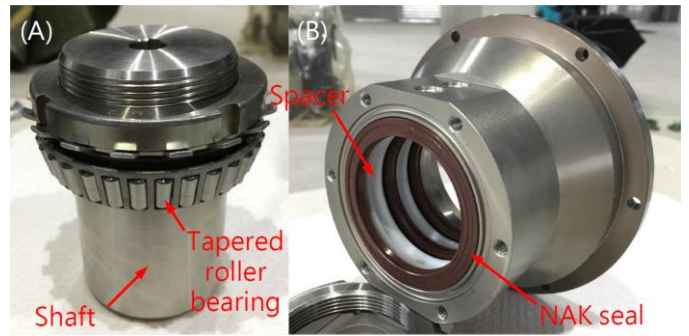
Photo of shaft seal module. (A) Shaft and tapered roller bearing; (B) The module housing and NAK shaft seals.
